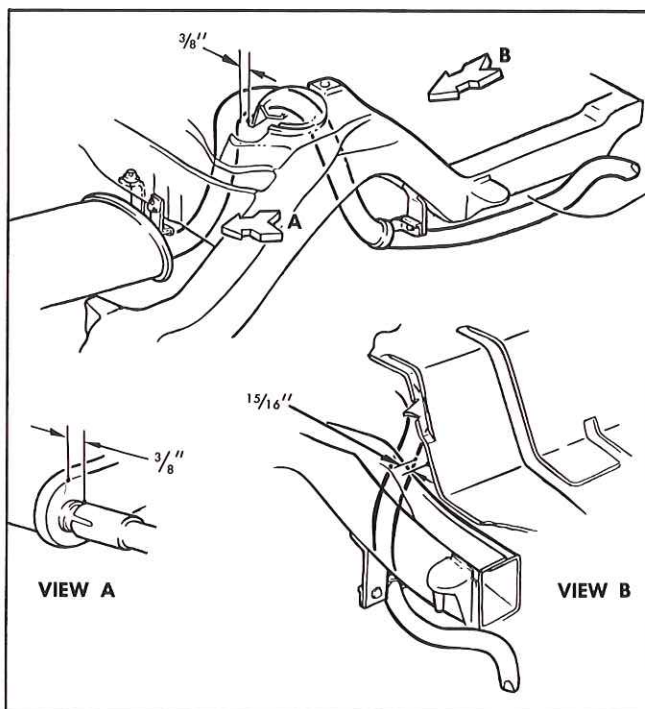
Chevelle Tail Pipe Clearance with V-8 Engine
